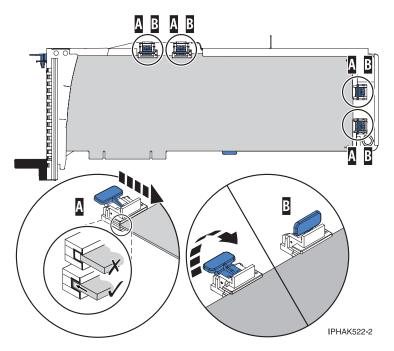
Large adapter in the PCI adapter cassette with the supports and stabilizer in place
